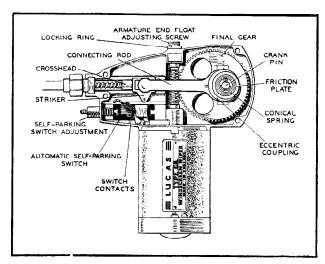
Model DR Windscreen Wiper Motor with Gearbox Cover Removed.
